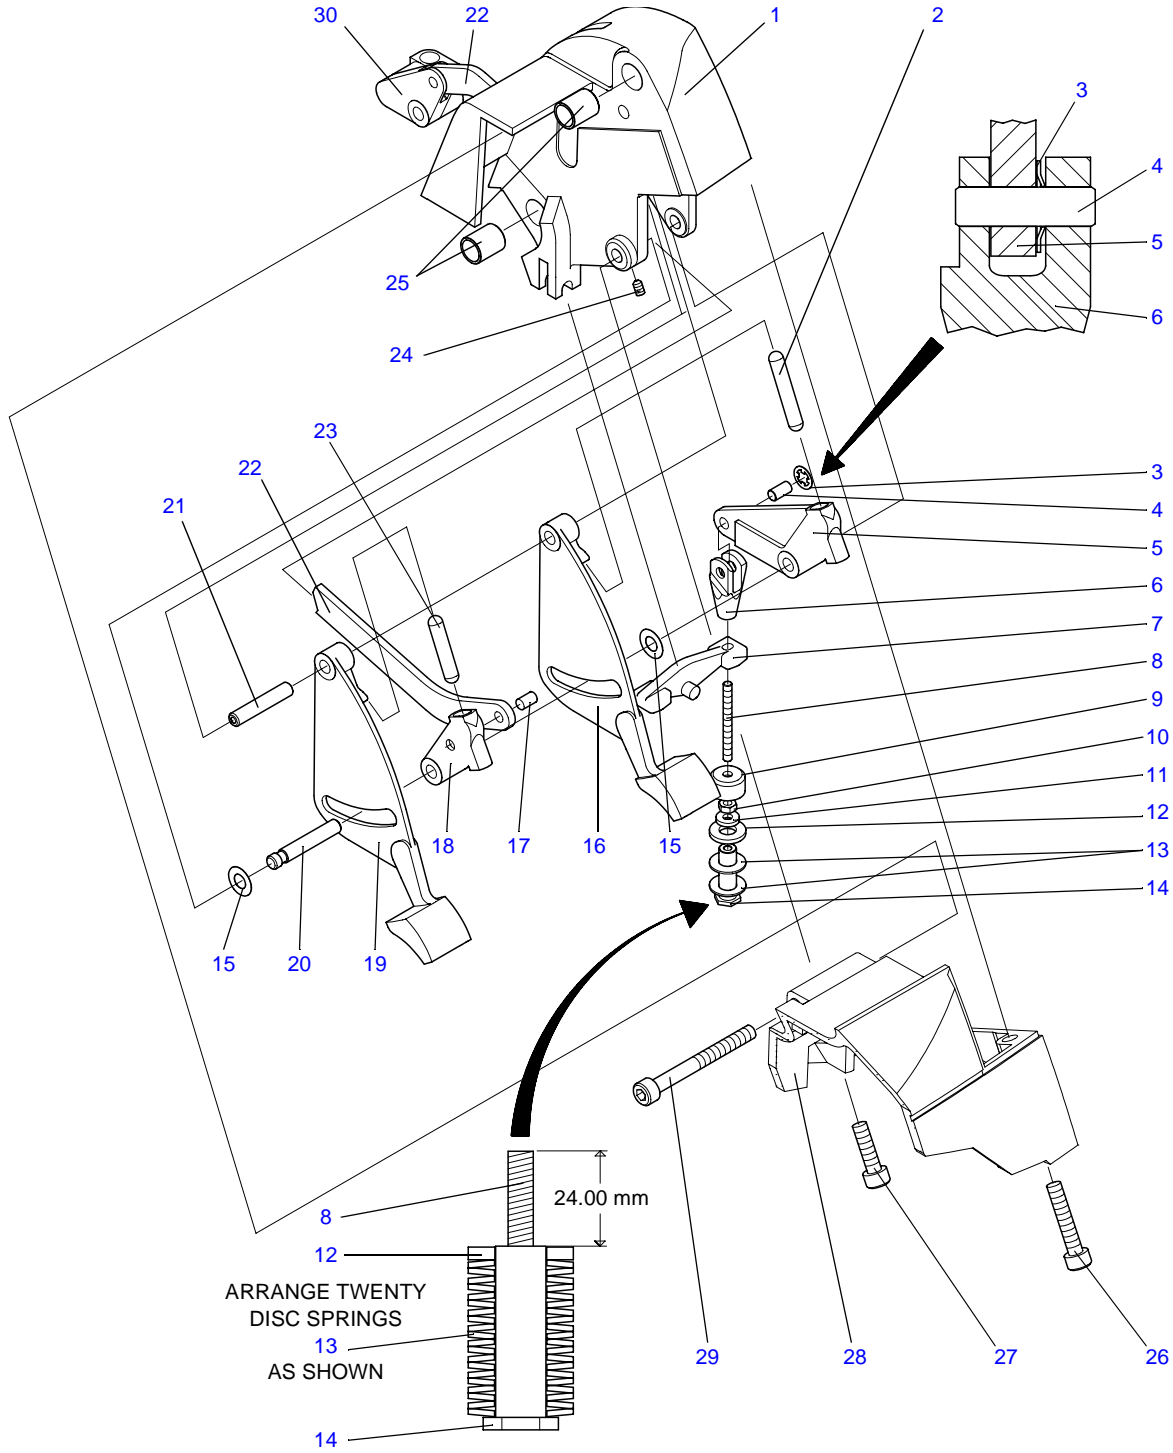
Vector 700/700H Pan and Tilt Head - Brake Lever Support Cap Assembly
